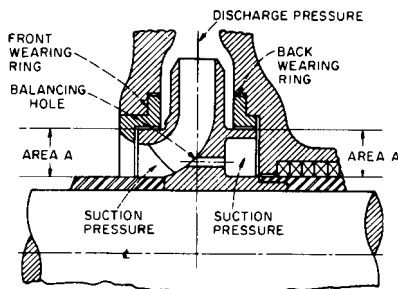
Balancing the axial thrust of a single-suction impeller by means of wearing rings on the back side and balancing holes
